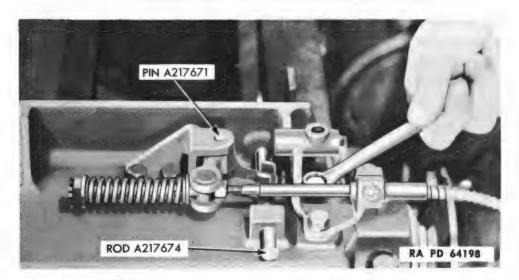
Disconnecting Foot Firing Mechanism Cable from Cradle 35. CRADLE ASSEMBLY.
